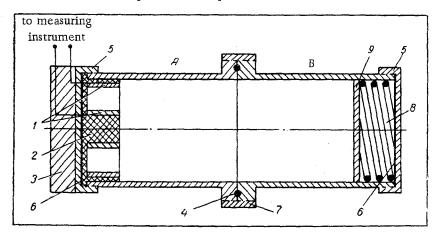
Measuring cylinder: A and B) copper or aluminum cylinders for investigated and standard materials; 1) detector electrodes; 2) ebonite receptacle; 3) plexiglass base; 4) rubber O-ring; 5) threaded cap; 6) flat rubber gasket; 7) threaded sleeve; 8) spring; 9) plexiglass plate.
